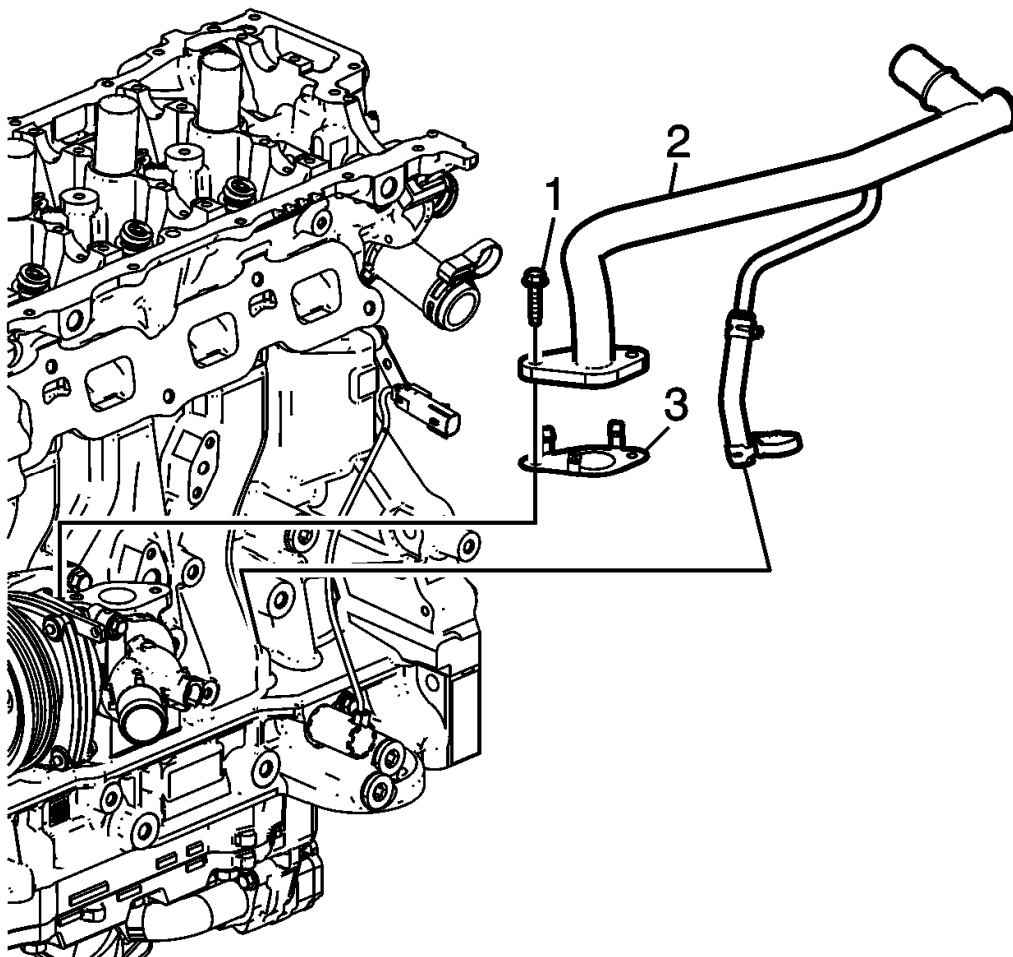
Thermal Bypass Pipe Bolts And Gasket
